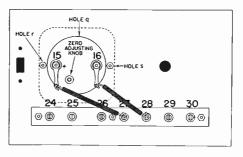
Rear view of front panel, showing how the meter and jack strip are mounted and connected together for the experiments which are to be made before assembling the N. R. I. Tester. The chassis is not shown in this view, but should be attached to the bottom of the panel according to instructions given in Step 2 of Experiment 11.
